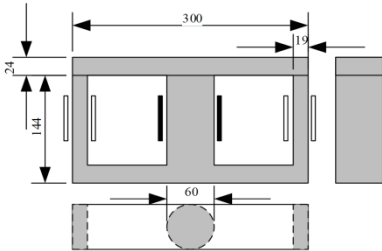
Dimensions of the iron core of the limiter. All dimensions are in millimetres.
